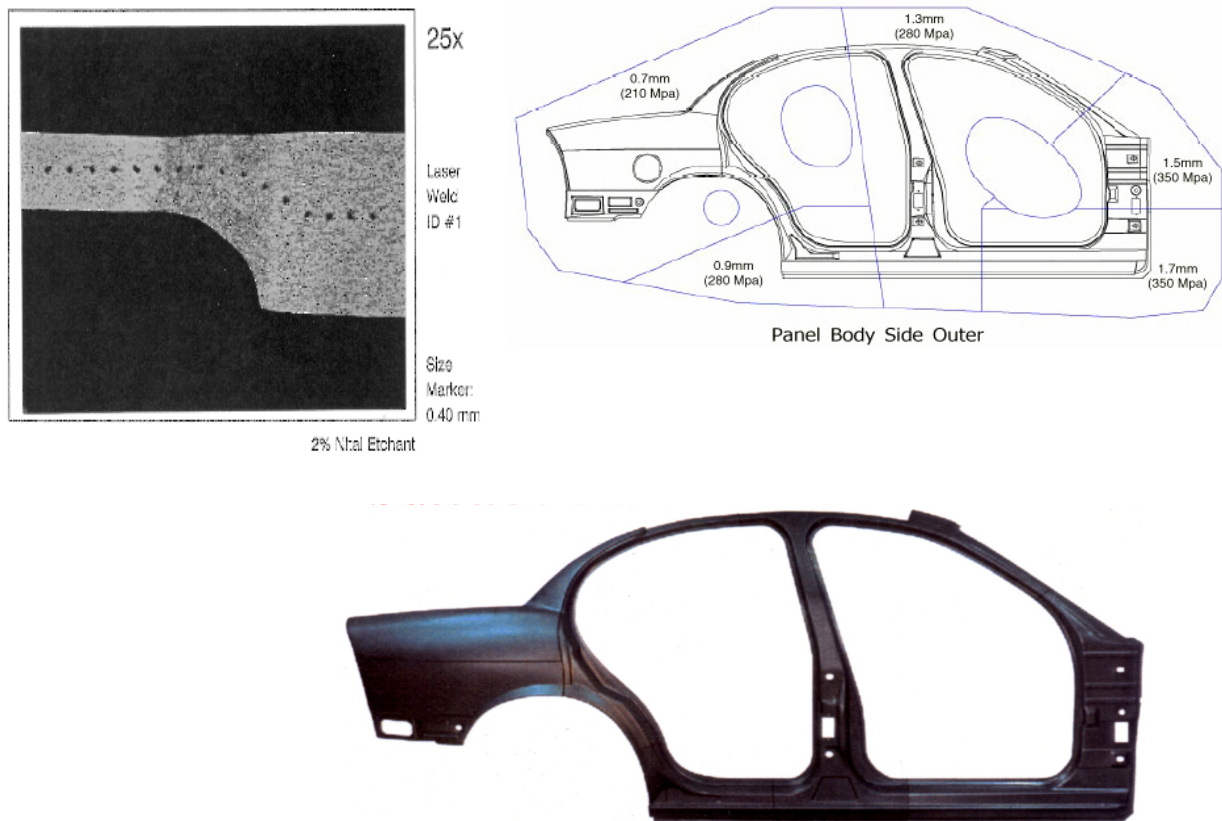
TWB side ring – blank and finished part; cross section of laser weld
